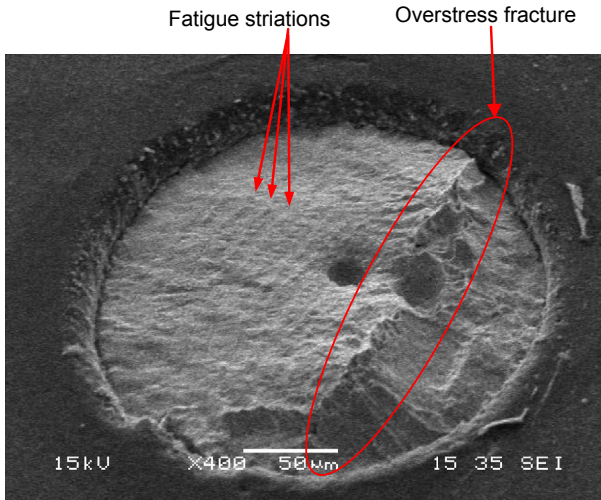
Evidence of fatigue failure in solder joint.
